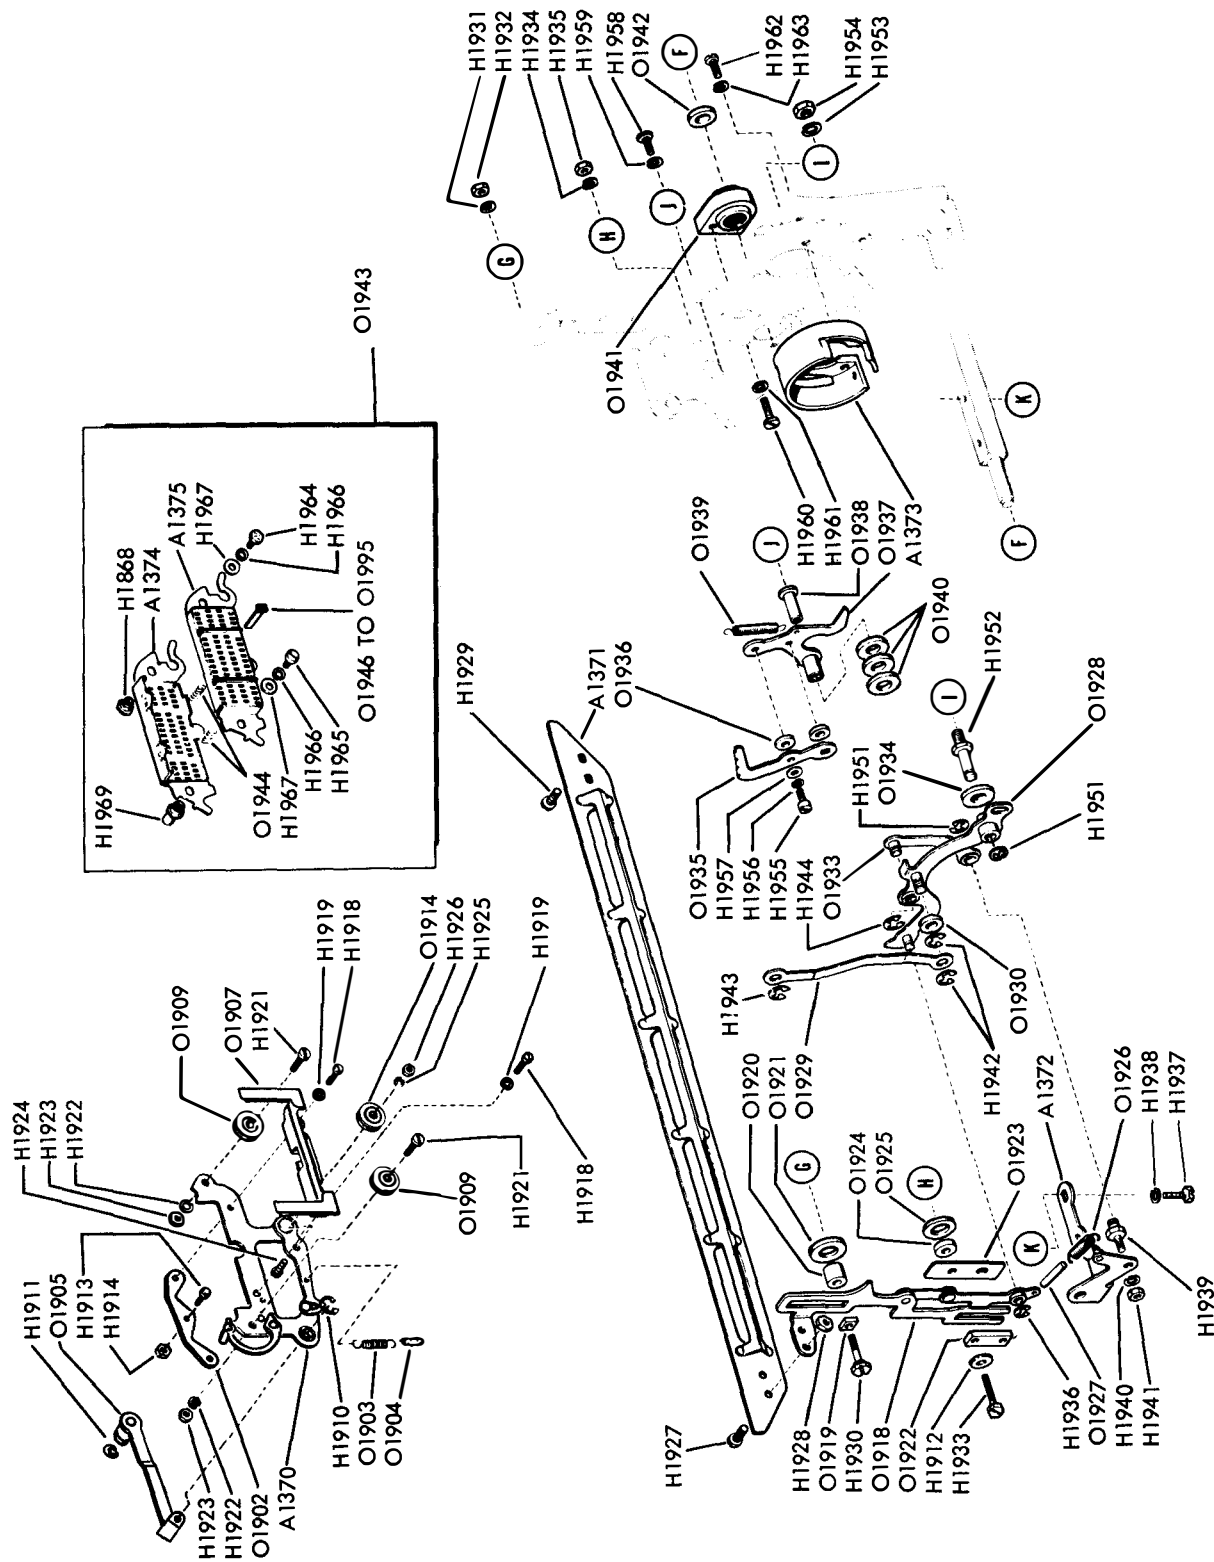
Automatic Typewriter, Right Side Linkage and Type Box Mechanism
